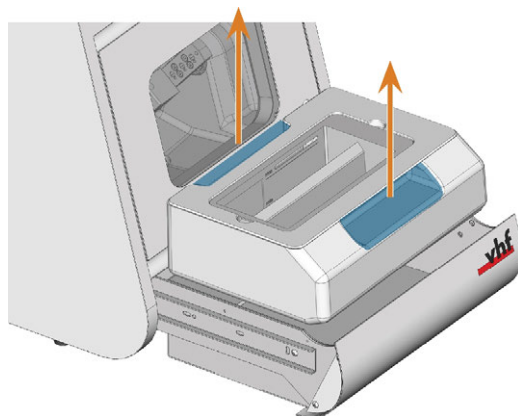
REMOVING THE COOLING LIQUID TANK FROM THE COOLING LIQUID DRAWER
